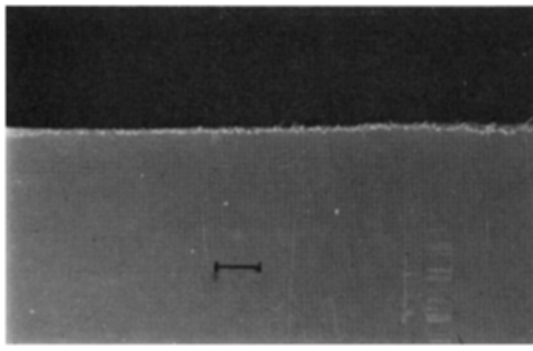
Fracture path typical of 1.35 and 2.4 mm thick specimens. Scale = 1 mm.
